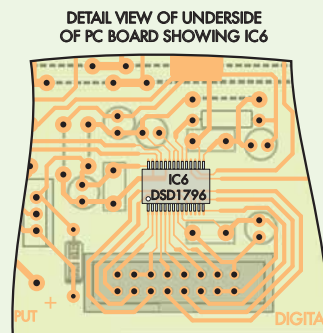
install IC6 on the copper side of the PC board, as shown here.
